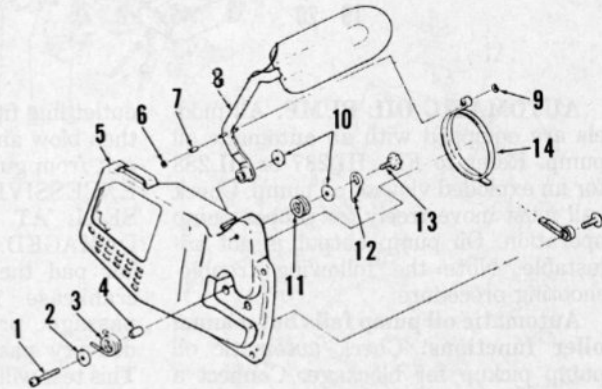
Exploded view of chain brake used on Model 550SL.
